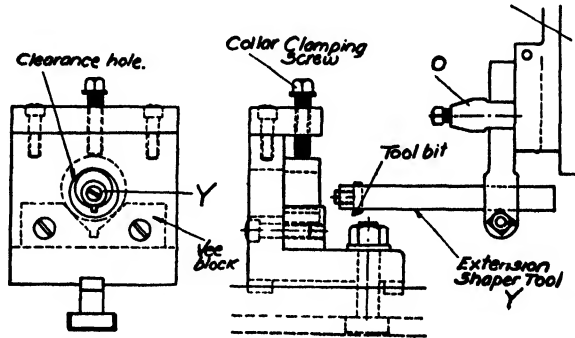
Special Fixture for Cutting Internal Keyways on a Shaper.
